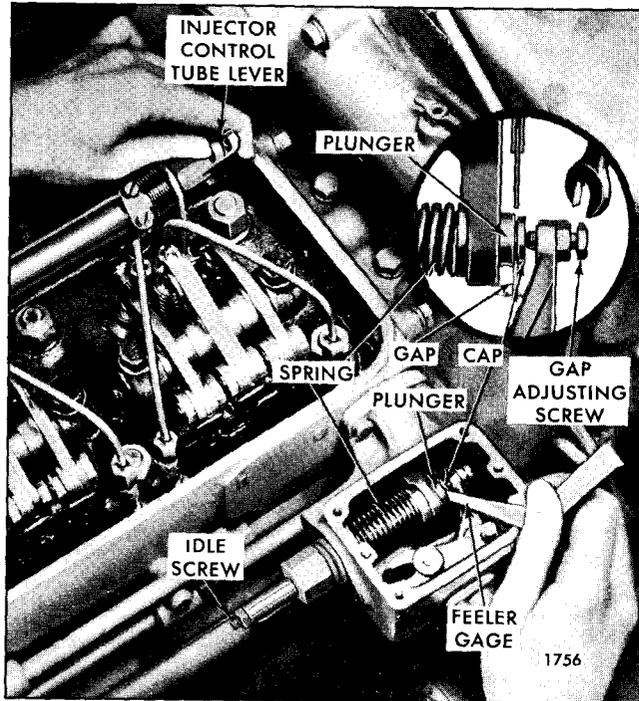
Adjusting Gap (Double-Weight Governor) using Tool J 3172
